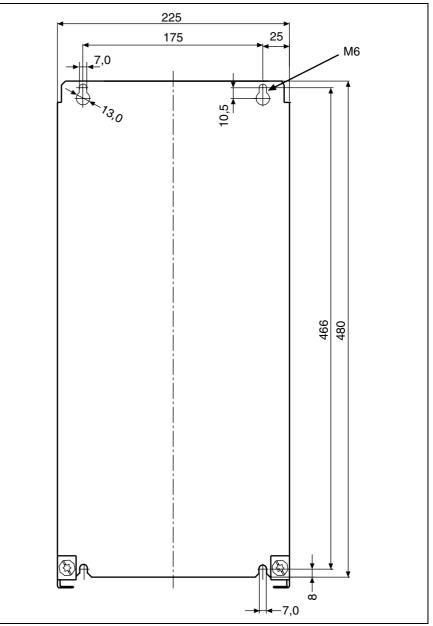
Dimensional drawing HCS03.1E-W0210 with HAS02
